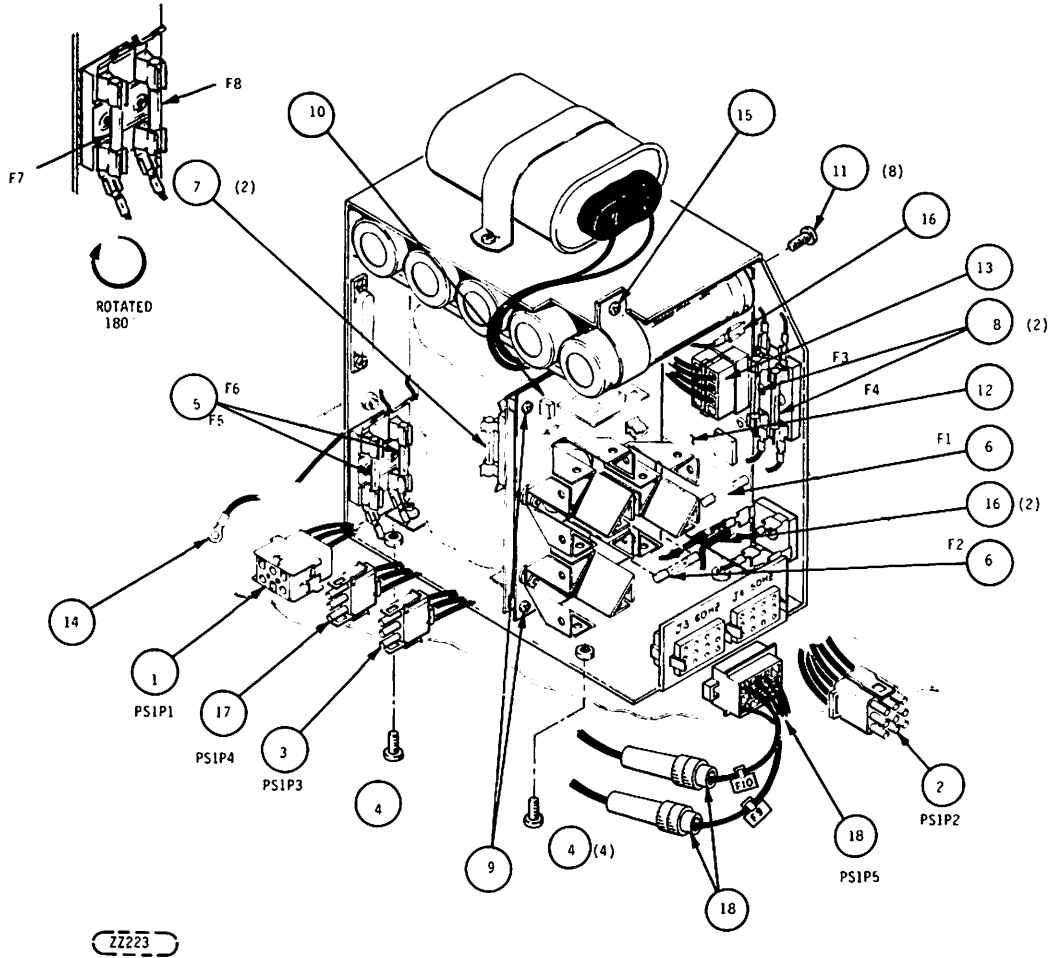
50/60 HZ POWER SUPPLY ASSEMBLY
